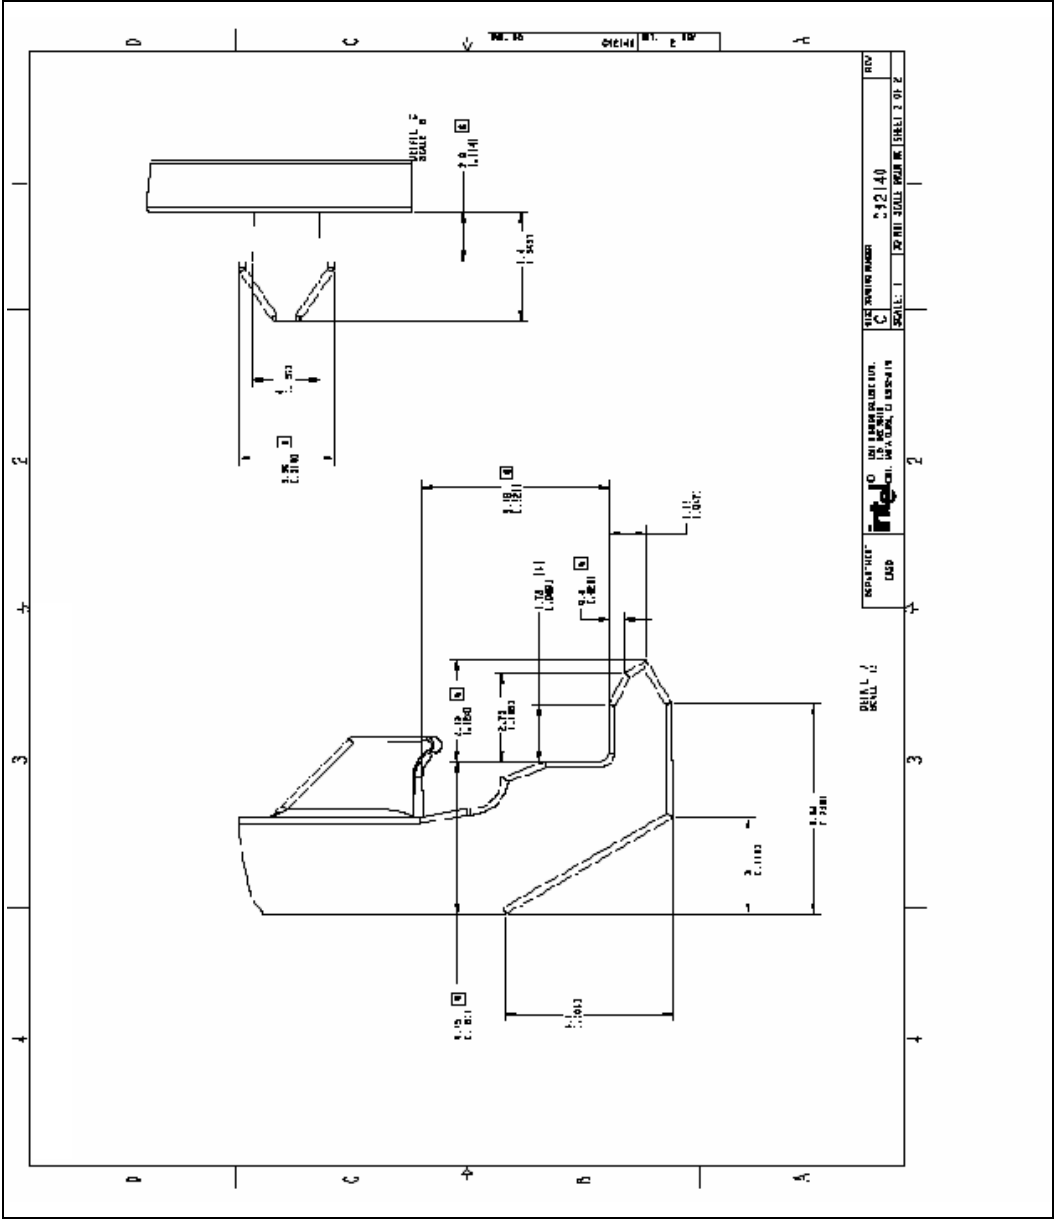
Plastic Wave Soldering Heatsink Wire Clip Drawing
